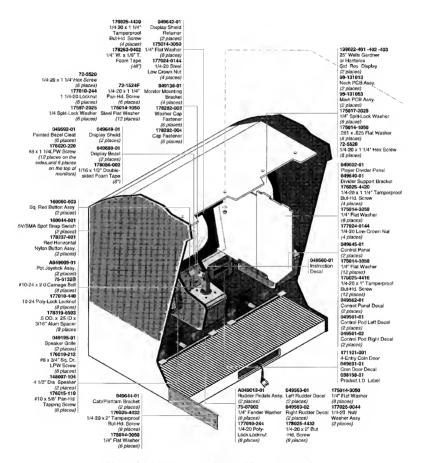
Cabinet-Mounted Assemblies, Front View A049570-01 D
